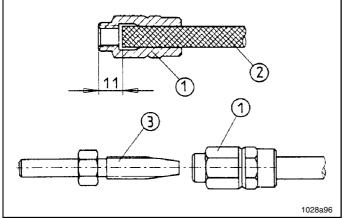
Pre-assembly of the threaded sleeves and hose studs onto the main line
